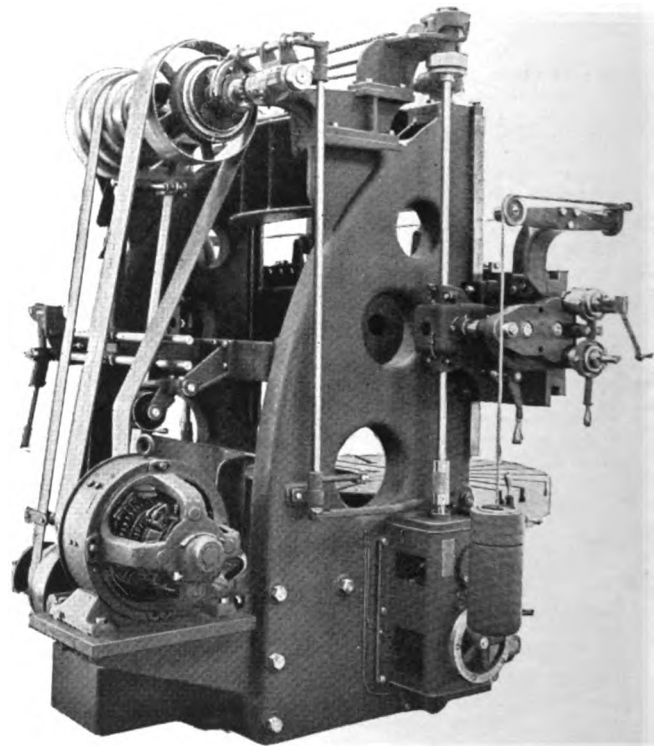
REAR VIEW OF COLBURN VERTICAL BORING AND TURNING MILL, SHOWING SIMPLICITY OF THE MOTOR DRIVE
